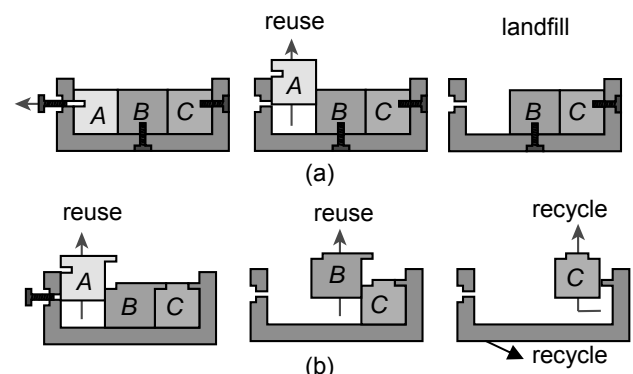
(a) conventional assembly (b) assembly with embedded disassembly.
